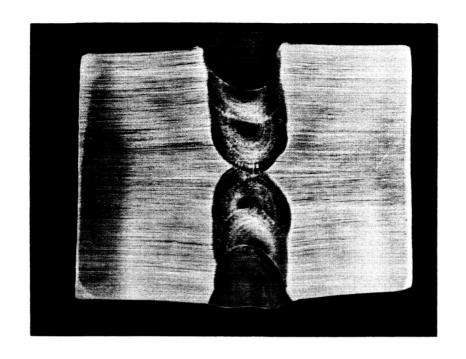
TYPICAL CROSS-SECTION AND JOINT PREPARATION FOR 0.50-INCH MIG WELDMENTS
